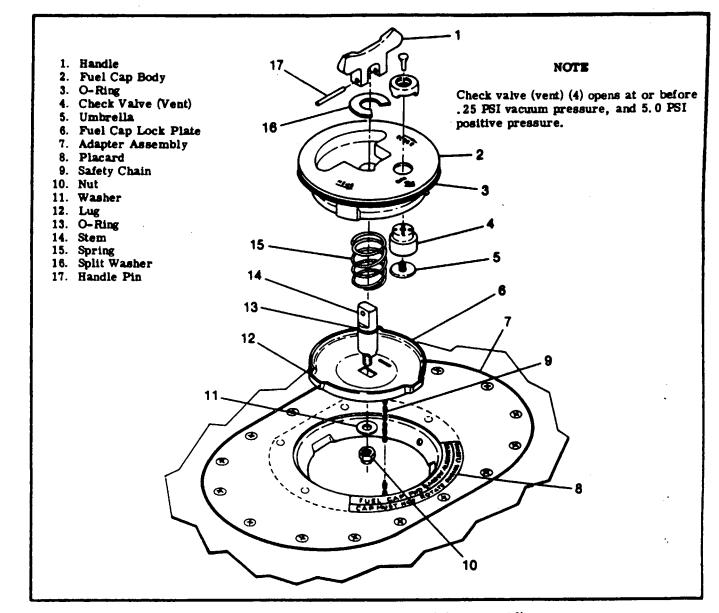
Fuel Filler Cap (Metal) (Sheet 1 of 2).
